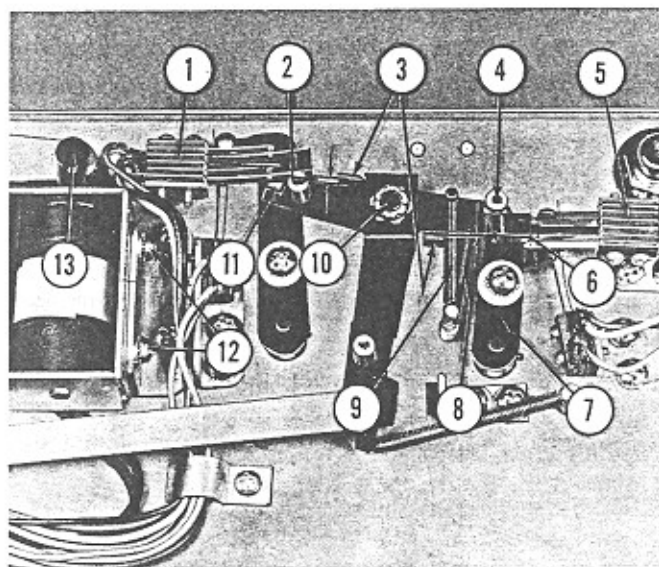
SELECTOR SWITCH LATCH ADJUSTMENT
